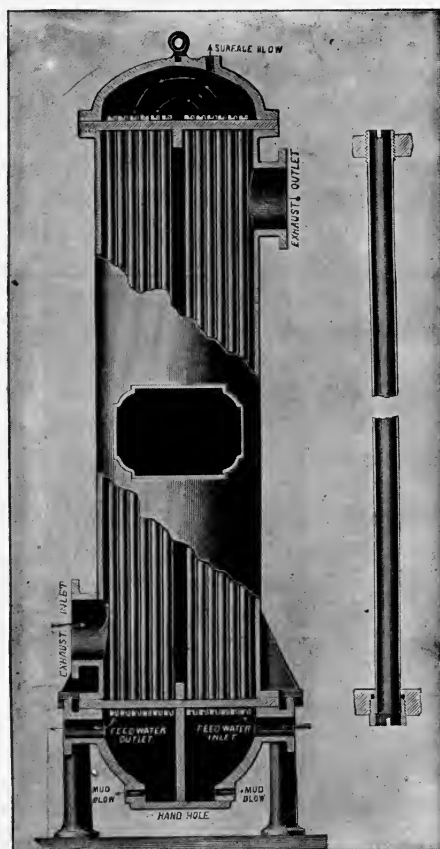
Heater made by the Wheeler Condenser and Engineering Co.
